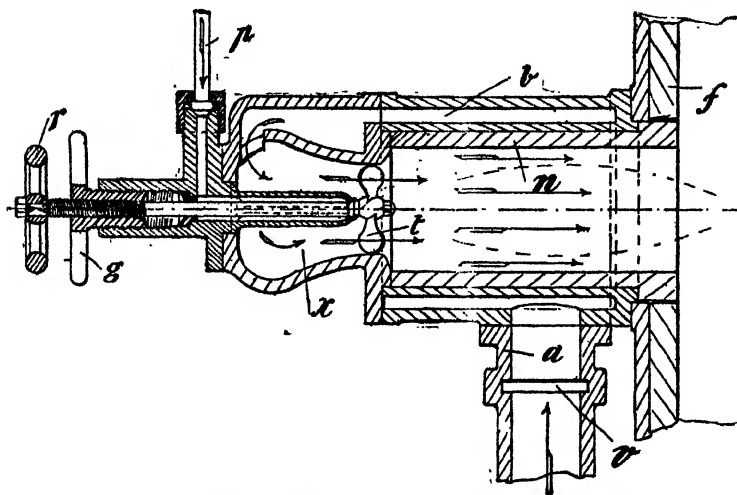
Brett's furnace fuel-oil burner fitted with preheating chamber and fan atomiser.
